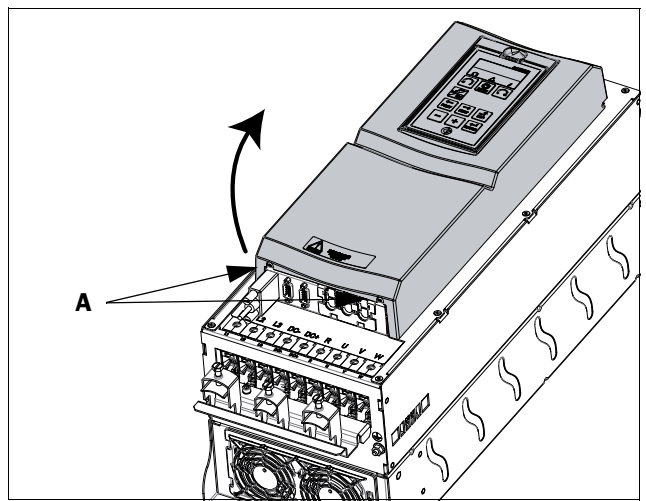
Remove the front cover on frame size C2 - F2 (principle drawing).
